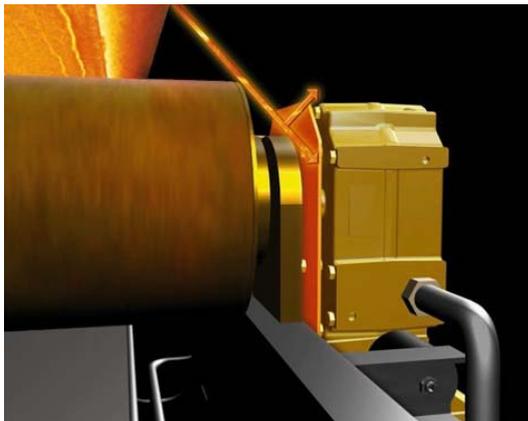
Integrated cooling jacket of the WATT geared motor CWA 80A IA132 D134MA6U
